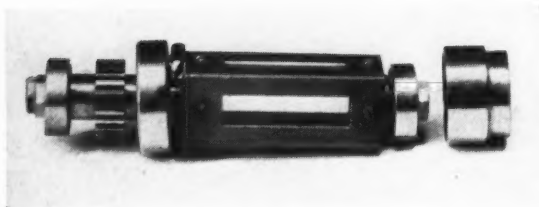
Prism assembly that was designed for the wide-angle Fastax
